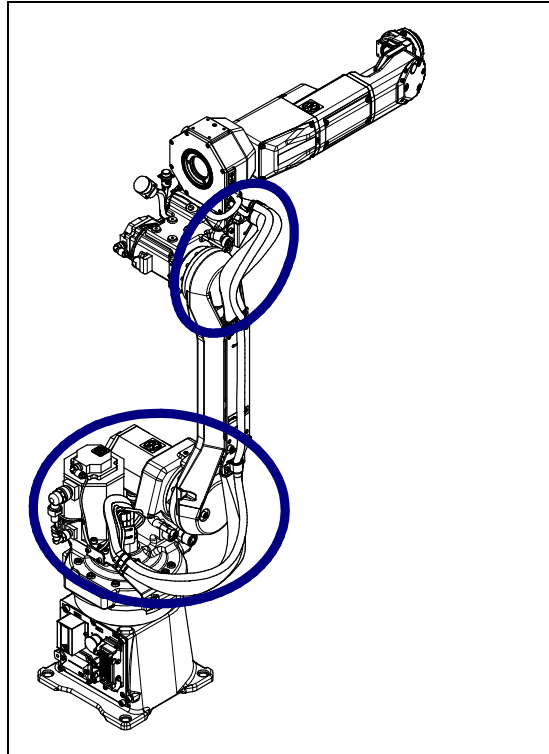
(a) Inspection points of the mechanical unit cables
